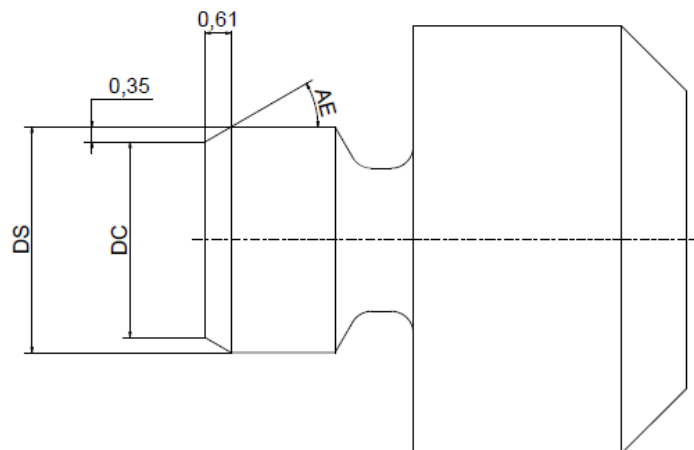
TEC side view illustrating angle AE about diameter DC and DS
